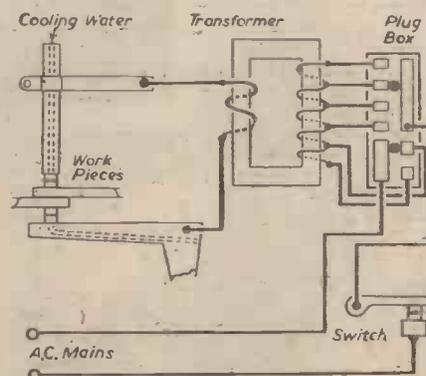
Schematic diagram showing water-cooled welding electrodes, and method of controlling output of transformer.
